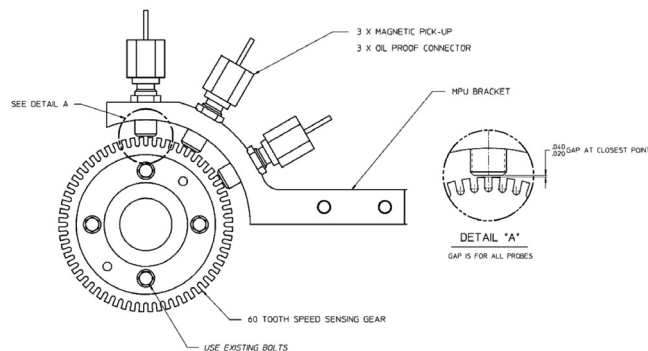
Speed Sensing Gear and Bracket with Three Probes. (Courtesy Woodward)
